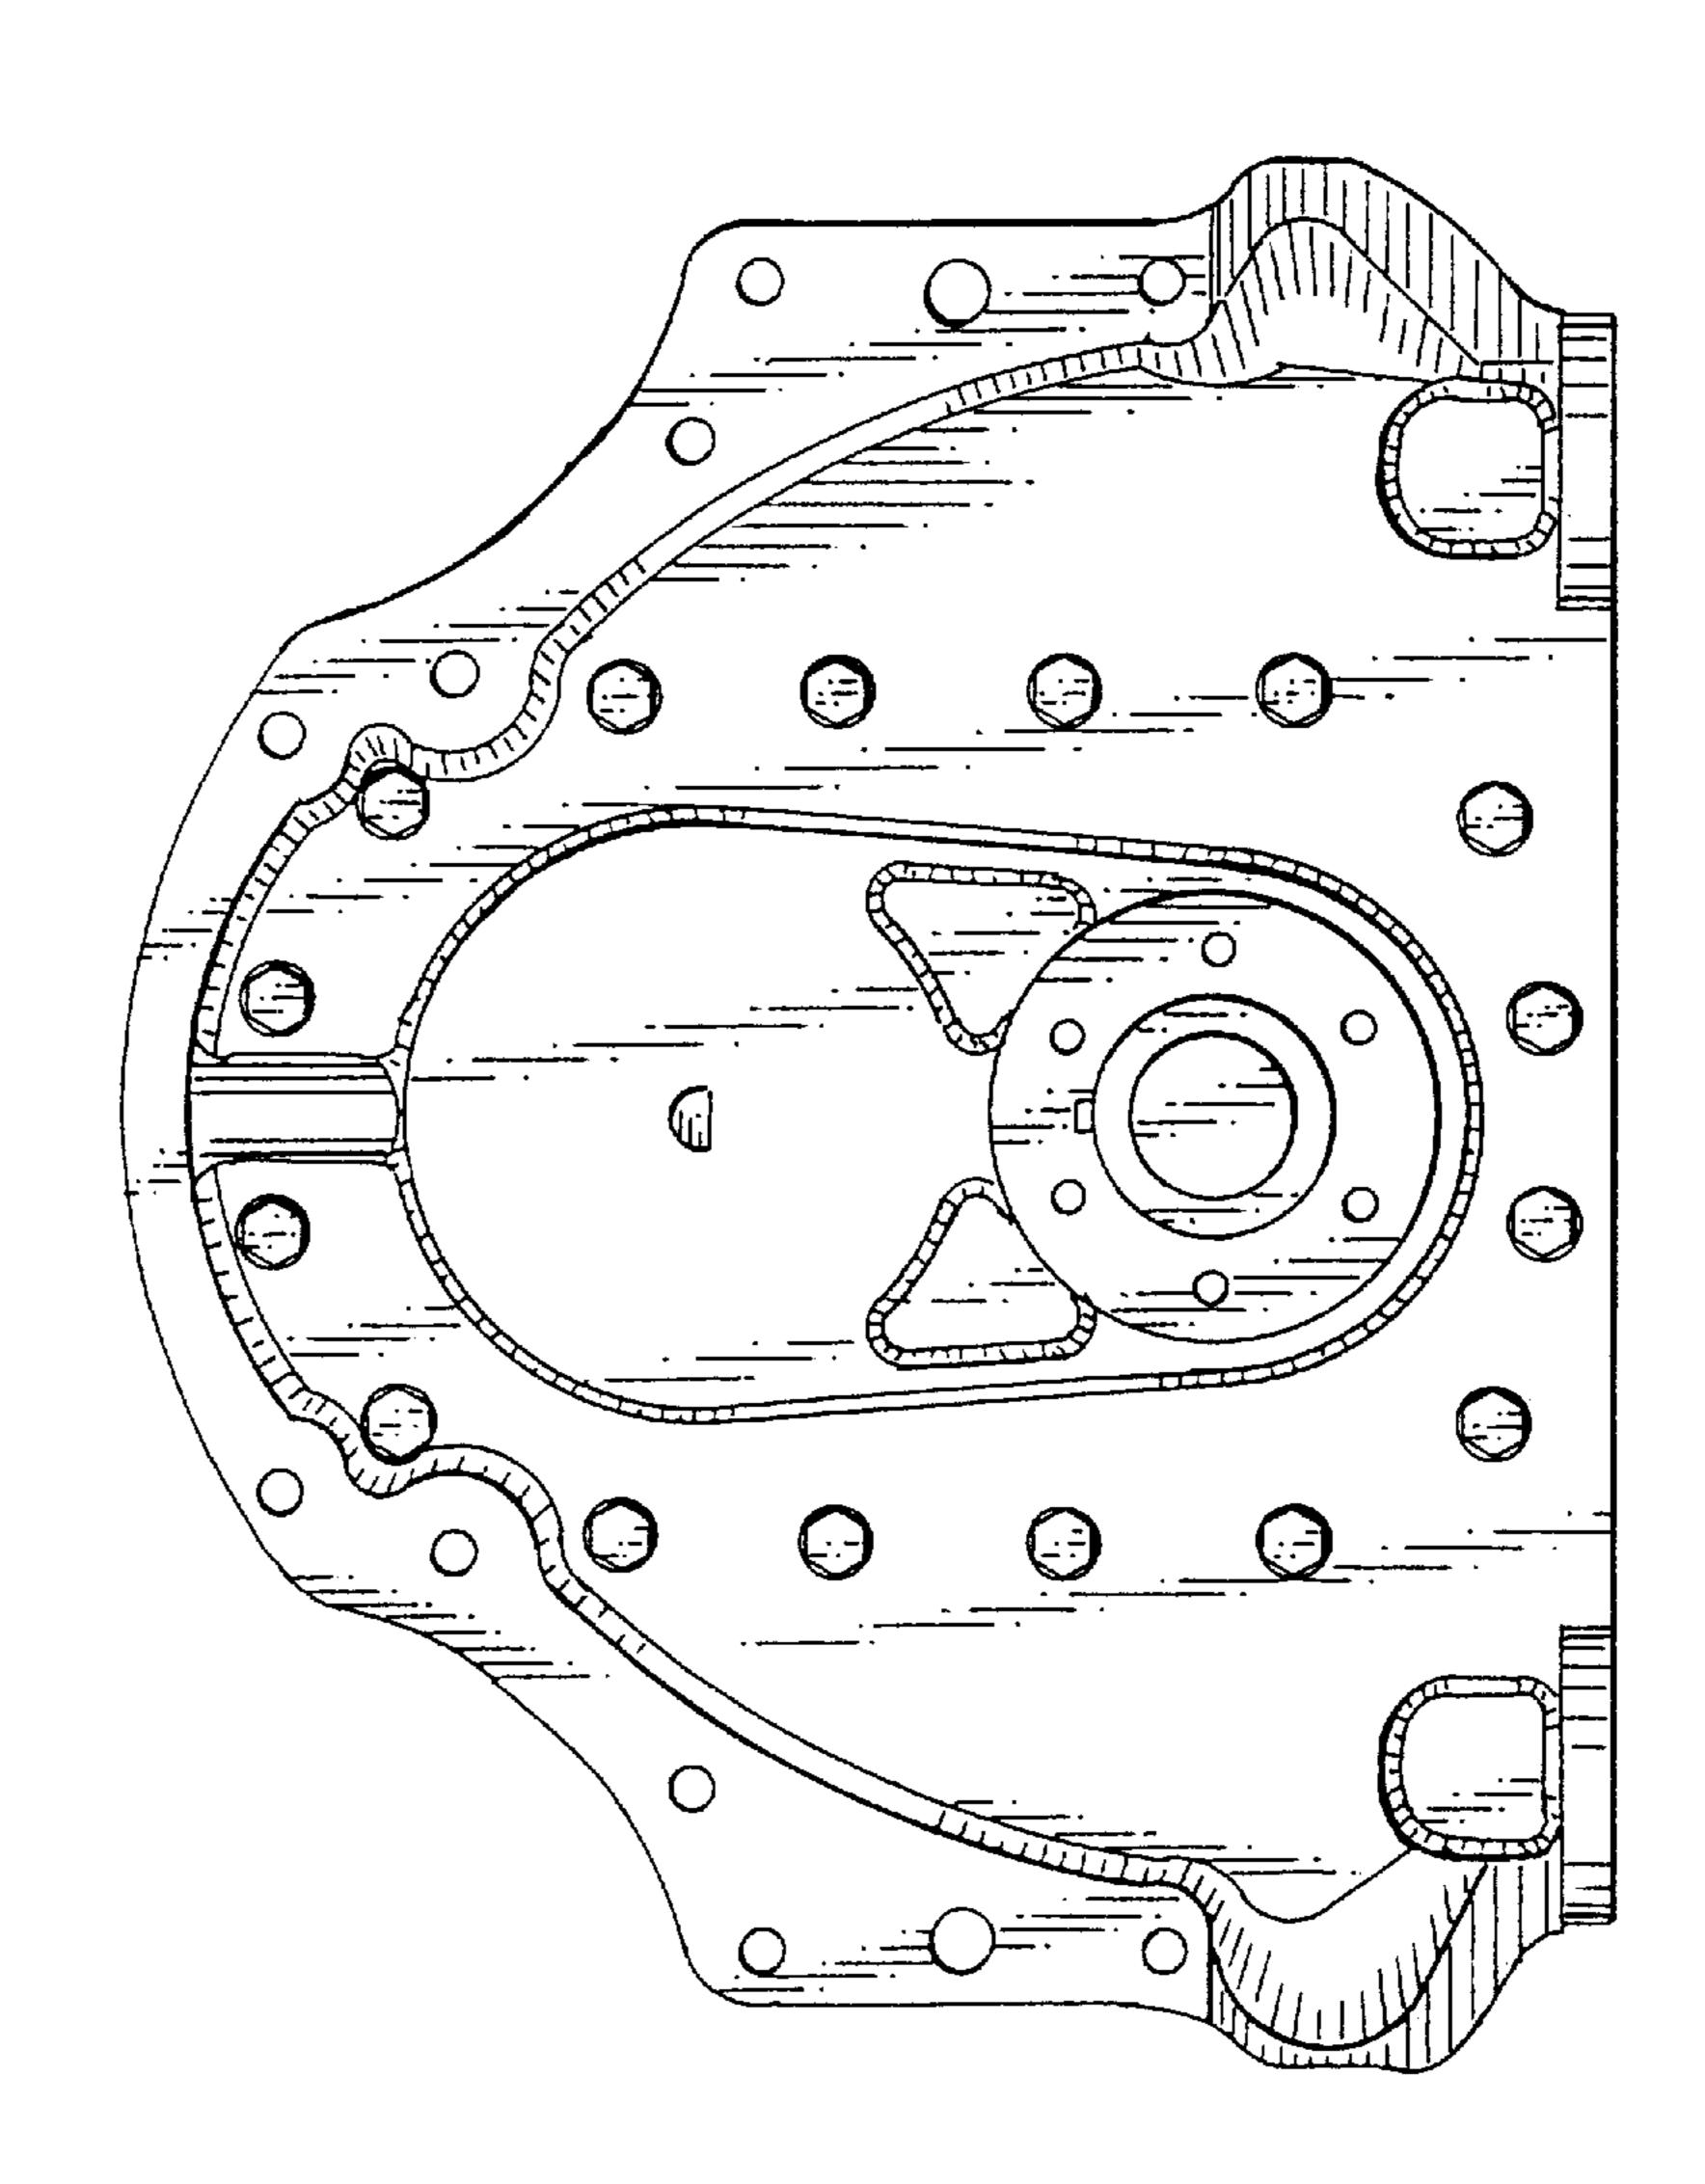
is a bottom plan view of my transmission housing having a bell housing.
